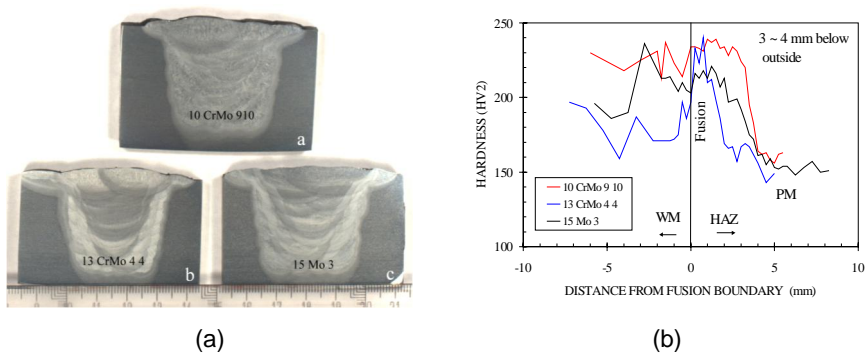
(a) Cross section of weld repaired joints having ex-serviced parent metal of 10 CrMo 9 10, but different weld metals. (b) Hardness measurements.
